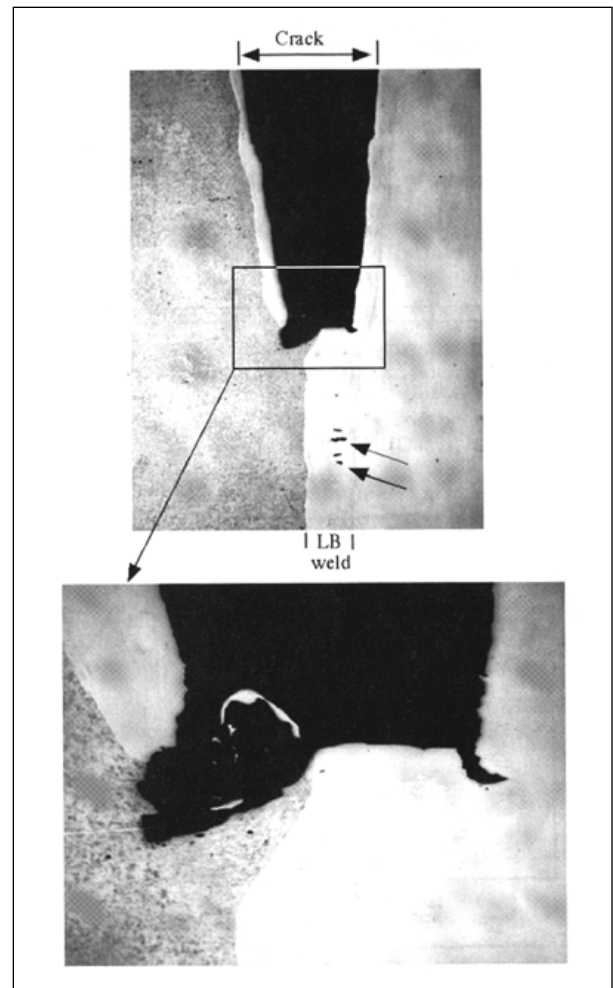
Crack propagation in dissimilar joint along the weld zone (small arrows indicating solidification cracks). Note crack path deviation into lower strength ferritic base metal.
